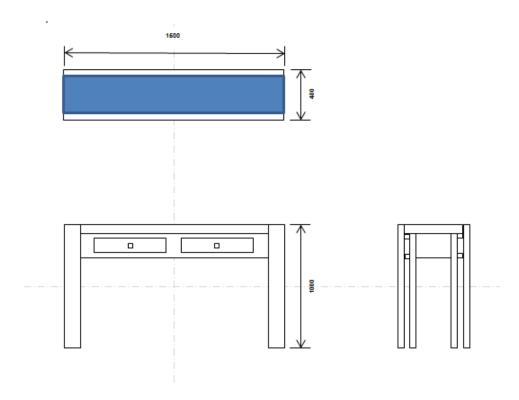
WORD 'SHAPES' CAD DRAWING
